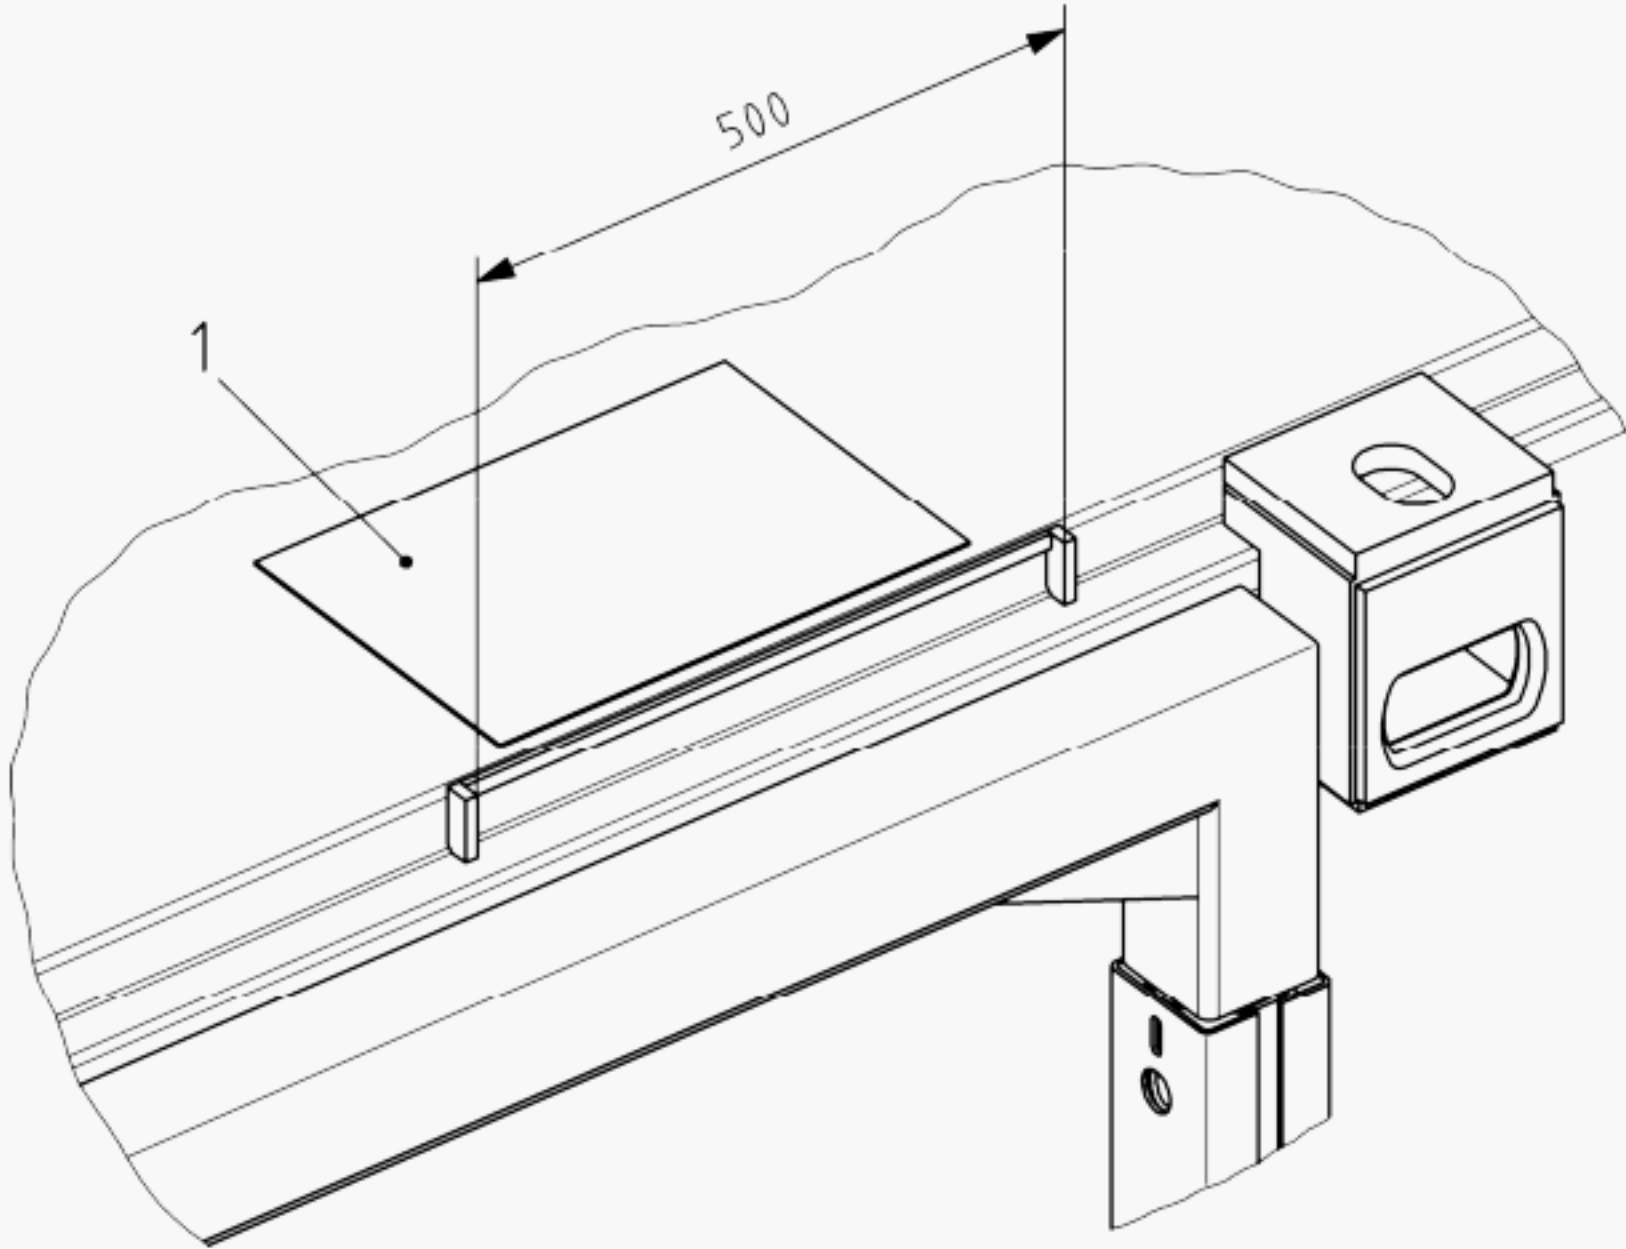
Grappler flange safety lip, end stops and wear-resistant plate – three dimensional view, seen from the bottom
